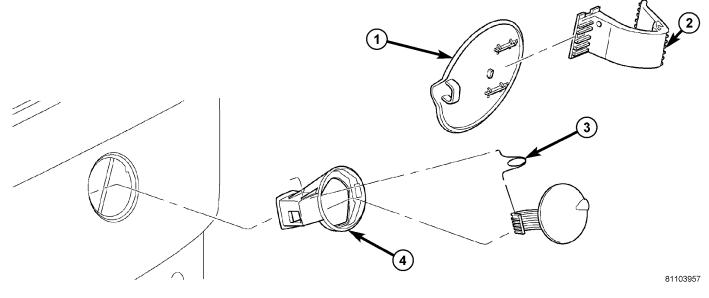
FUEL FILL DOOR/HINGE AND HOUSING
